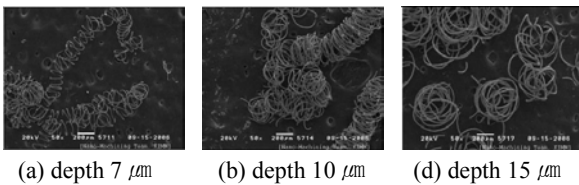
Chip formation of micro V groove machining (cutting tool 60°diamond, feed speed 10,000 mm/min)
